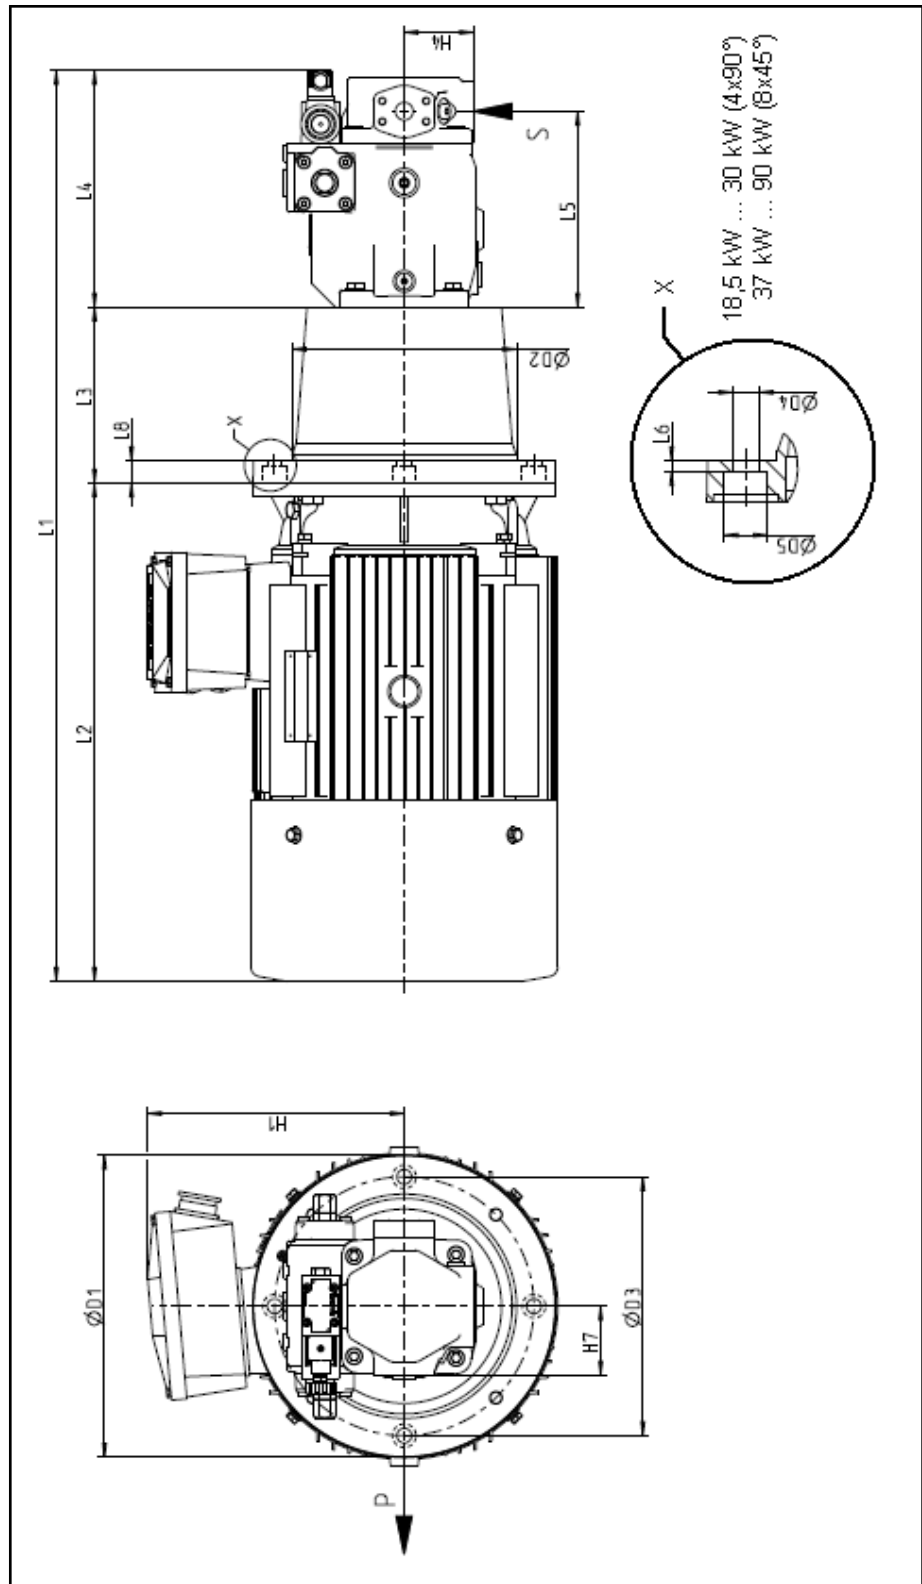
Dimension sheet "MPES2" with "A4VSO" in the fastening mode "V" (vertical flange fastening, without foot)
